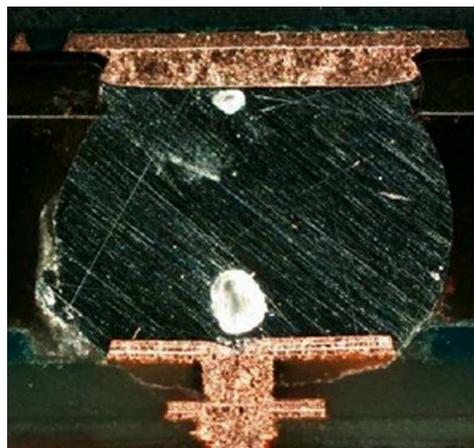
Typical failure in a printed circuit board. The solder ball in the middle is connecting the component at the top with the PCB at the bottom. The crack is going through the outermost insulating epoxy resin layer.
